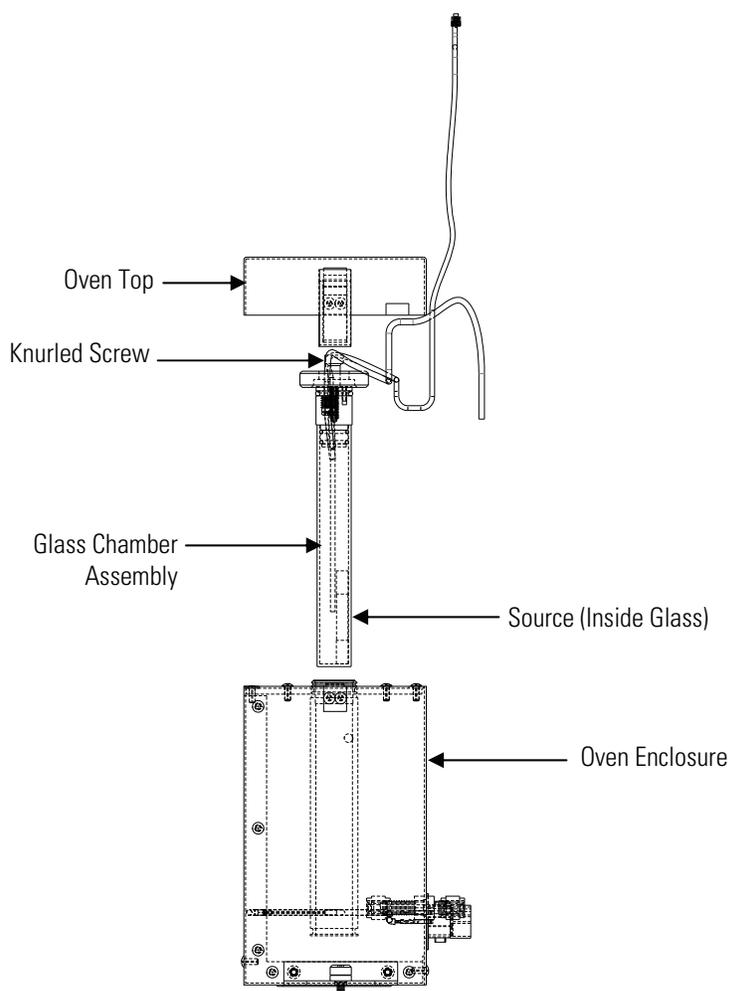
Removing and Replacing the Glass Chamber Assembly
